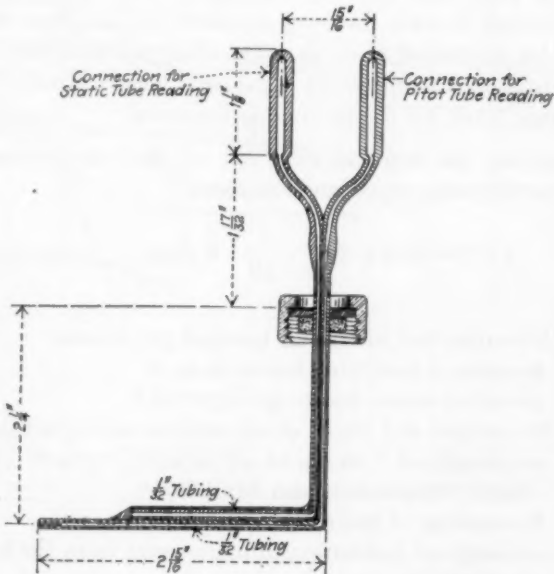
DETAIL OF PITOT AND STATIC TUBES
